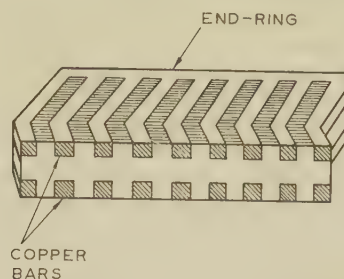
Arrangement of bars in a herring-bone rotor.
